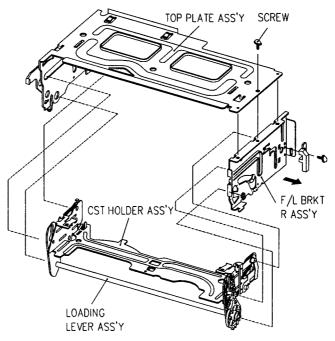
DISASSEMBLY OF THE FRONT LOADING ASS'Y
